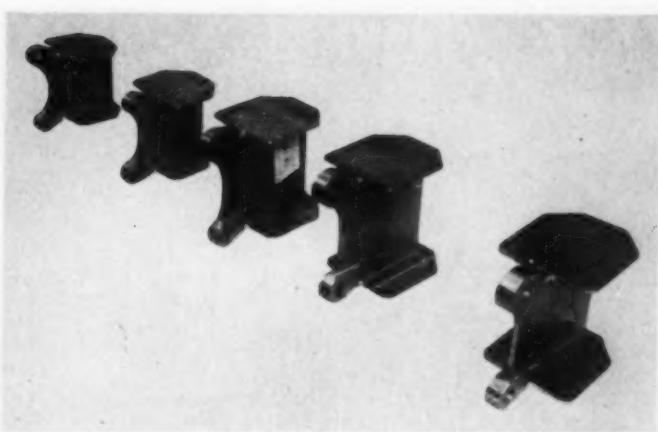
Group of ultra-high-tensile wing attachment forgings.
